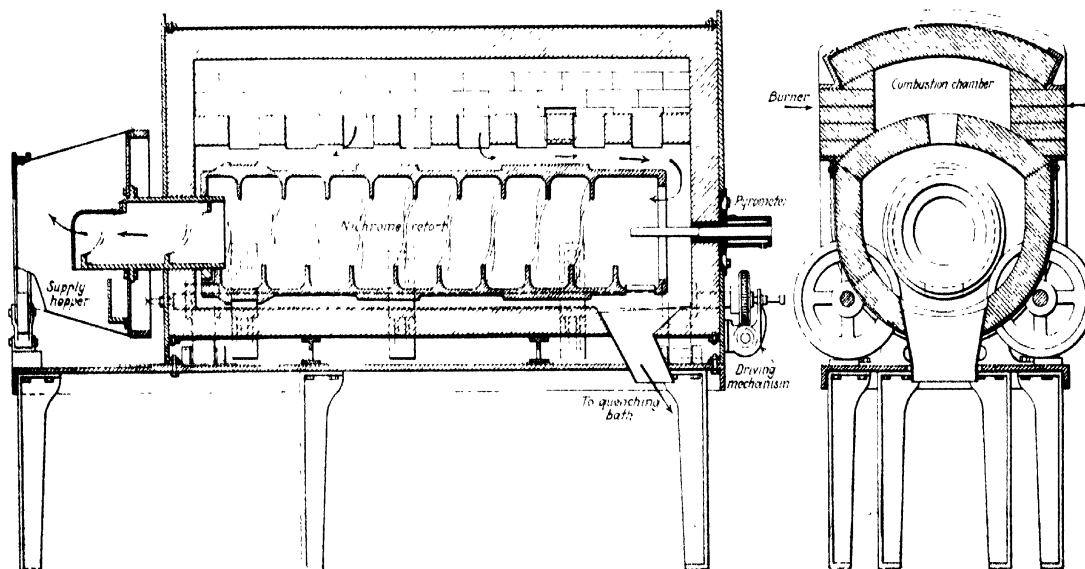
ROTARY RETORT FOR HARDENING ROLLERS
